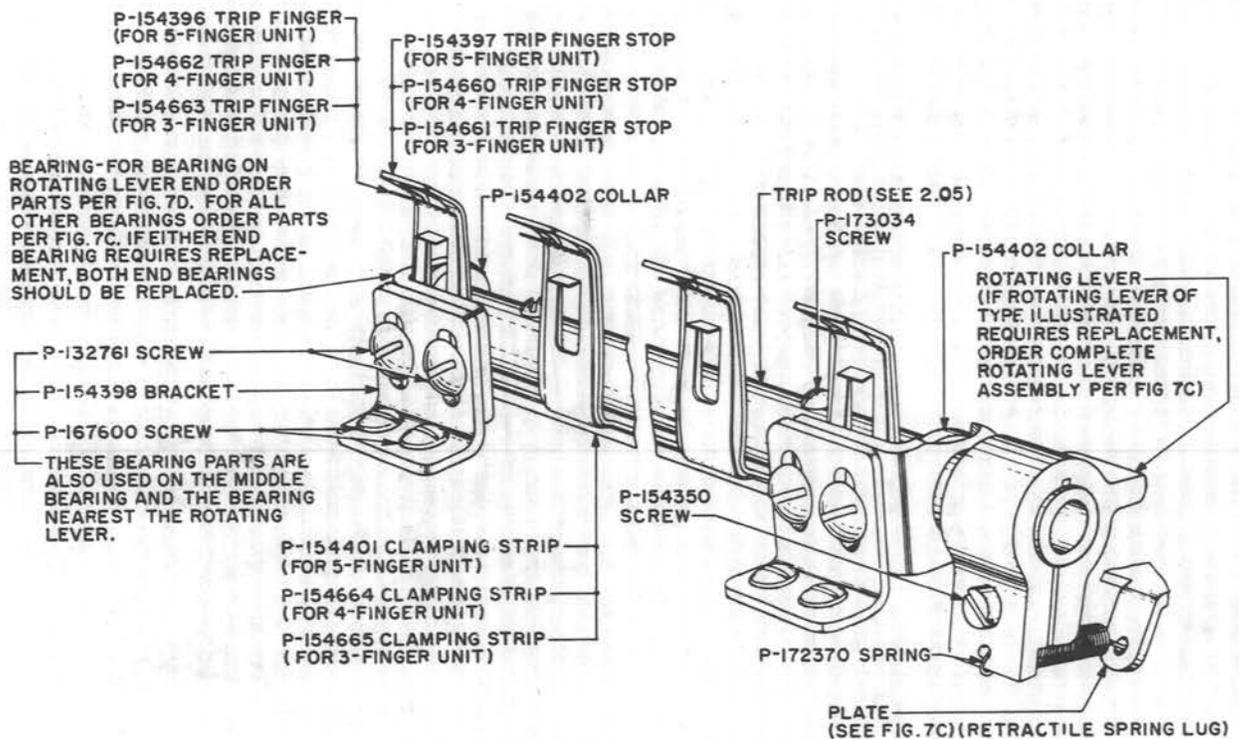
A - Trip Rod With One Collar at Each End of Rod
